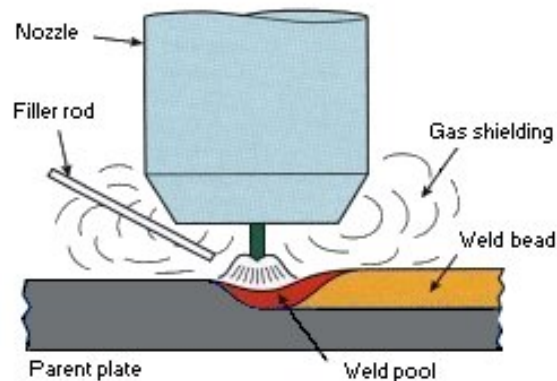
Schematic view of gas tungsten arc welding [48].
